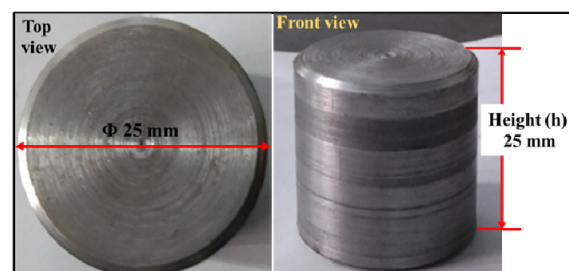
3D views of the actual EN 8 steel rotor blank with dimensions
